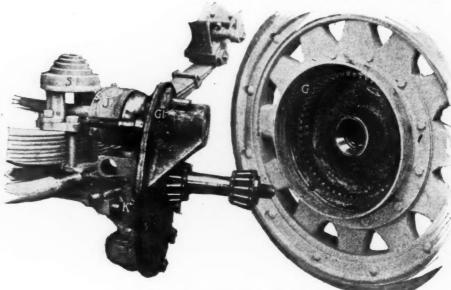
DETAIL OF JEFFERY QUAD DRIVE
